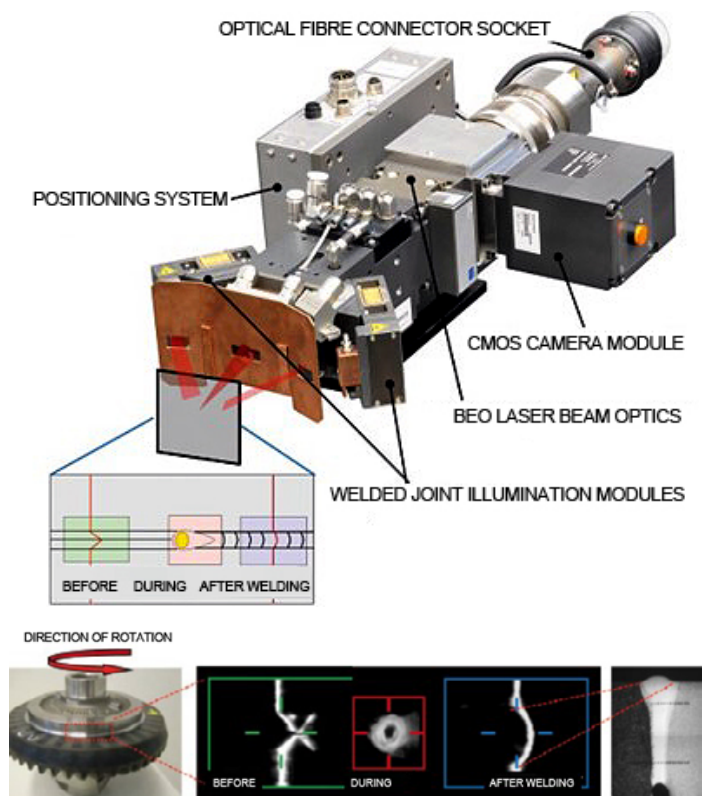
Laser head equipped with an online monitoring system (SeamLine Pro) containing three optical sensors (NIR camera and two visible radiation cameras) monitoring the quality of joints BEFORE, DURING and AFTER the laser welding process; exemplary application in the welding of a butt joint of the hub and the rim of a toothed wheel; the position of the joint of the hub and the rim is precisely measured in the window concerned with the stage BEFORE welding, the keyhole is monitored DURING welding and the width of the weld face is measured AFTER the completion of the welding process [14]
